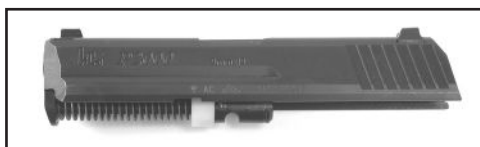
(recoil spring assembly and barrel properly positioned in the slide)
